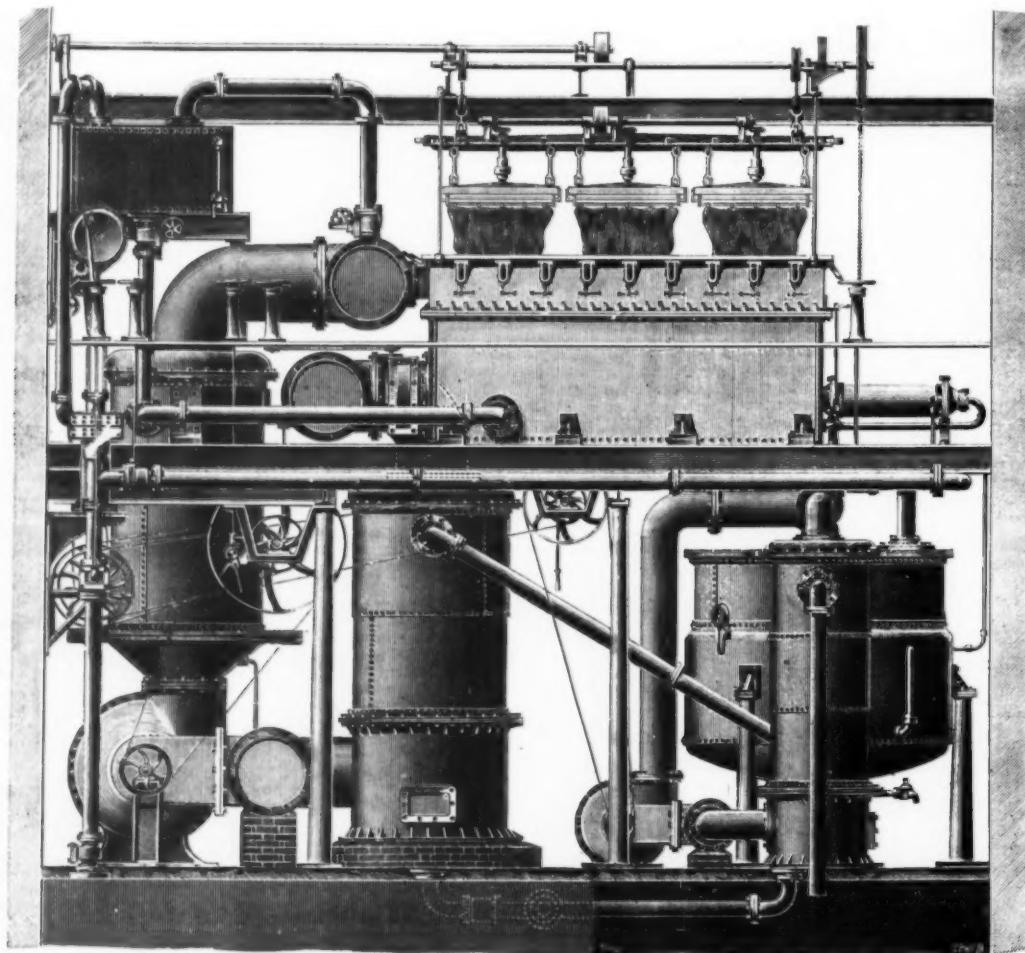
MACHINERY FOR DEGREASING LEATHER.
